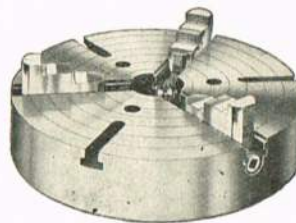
Independent 4-Jaw Chuck, cast iron body, hardened steel jaws, reversible.
